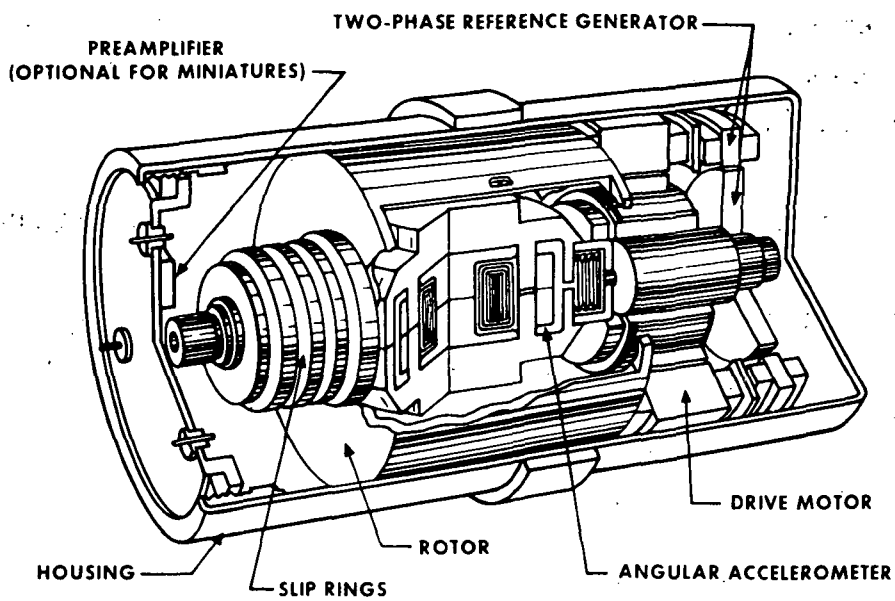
GG2500 MHD Rate Sensor - Cutaway View
